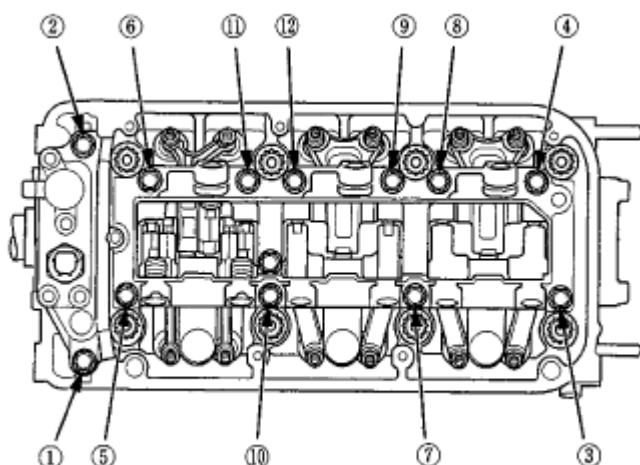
Identifying Rocker Shaft Bridge Mounting Bolts Tightening Sequence (Front)
